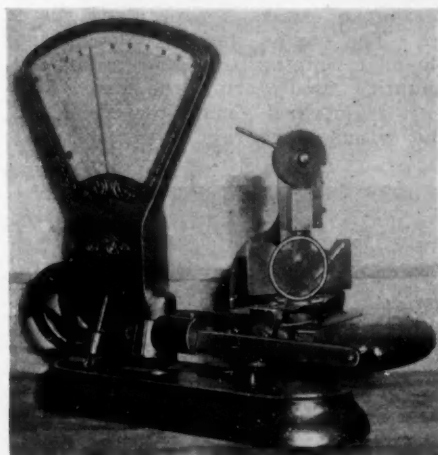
WEIGHING THE TENSION OF A PISTON-RING
